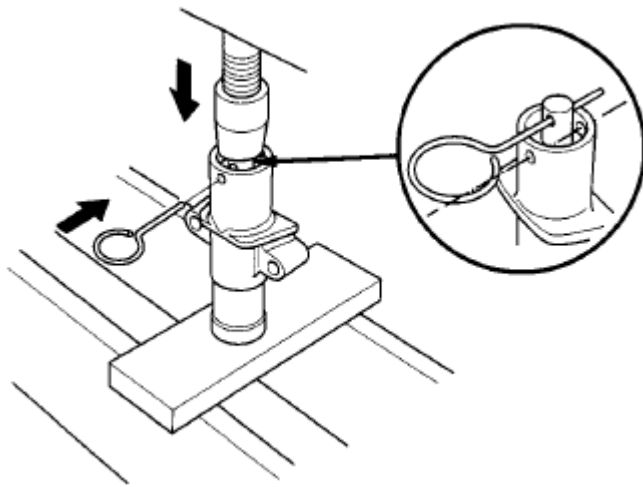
Aligning Holes On Rod And Housing Of Auto-Tensioner
